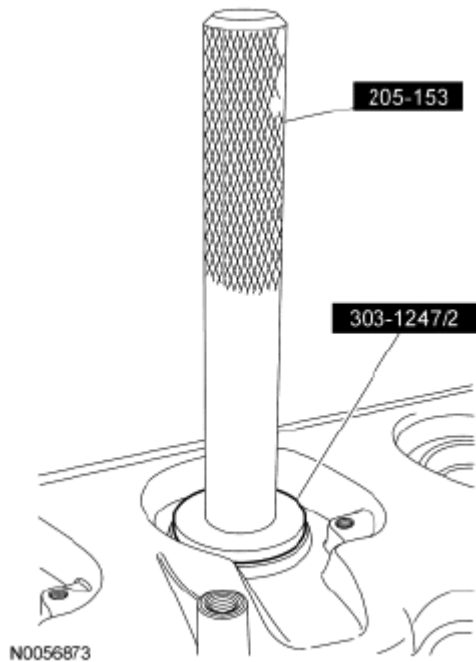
Identifying VCT Spark Plug Tube Seal Installer And Handle
